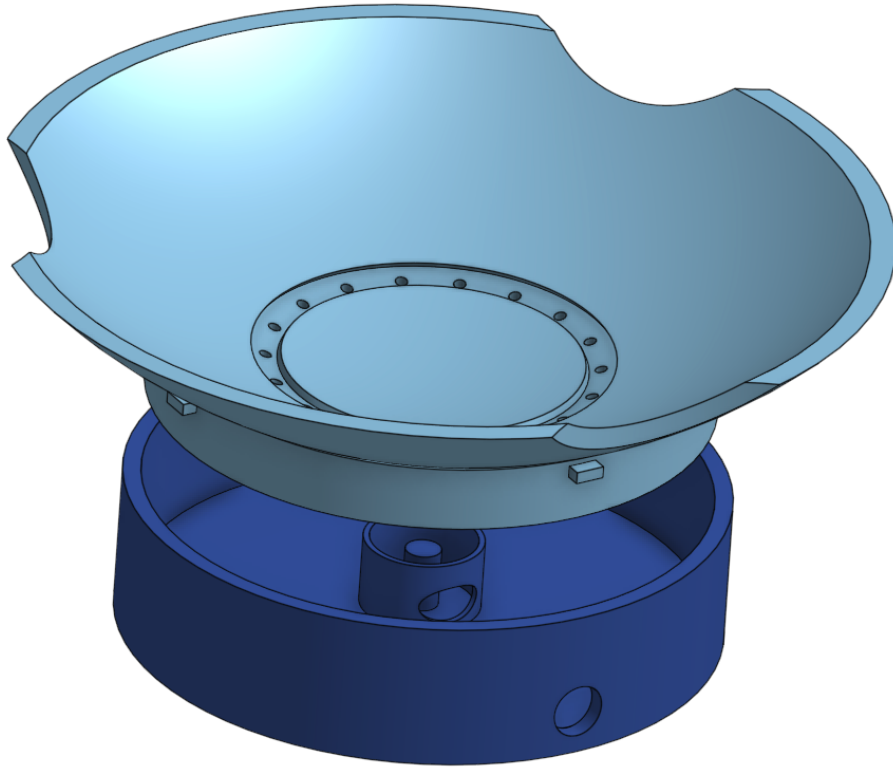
Exploded view of the two stator parts showing the internal air chamber.
